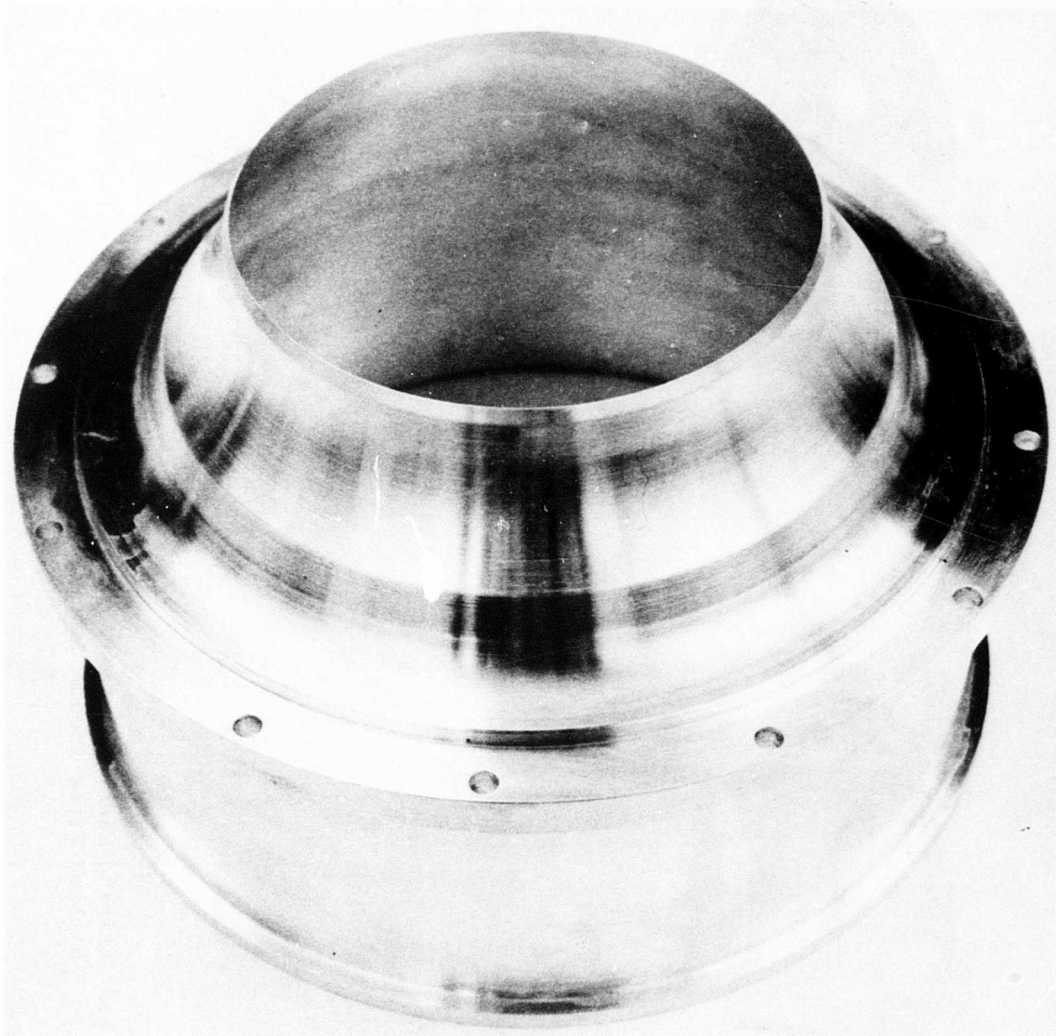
Bellmouth Liner for Inlet Casing Used With Buildup A,
